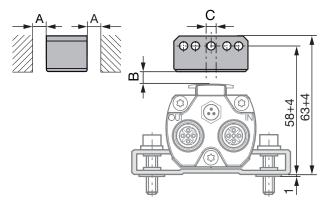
Dimensions and spacing with magnet BTL6-A-3801-2
